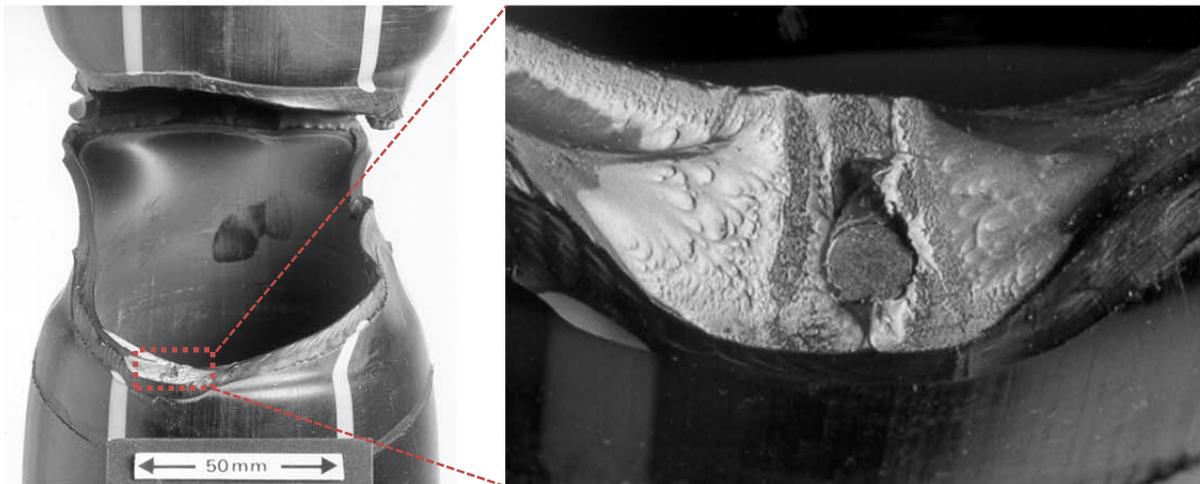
Photographs of a failed weld in 125mm OD pipe containing a 4mm diameter aluminium disc.
